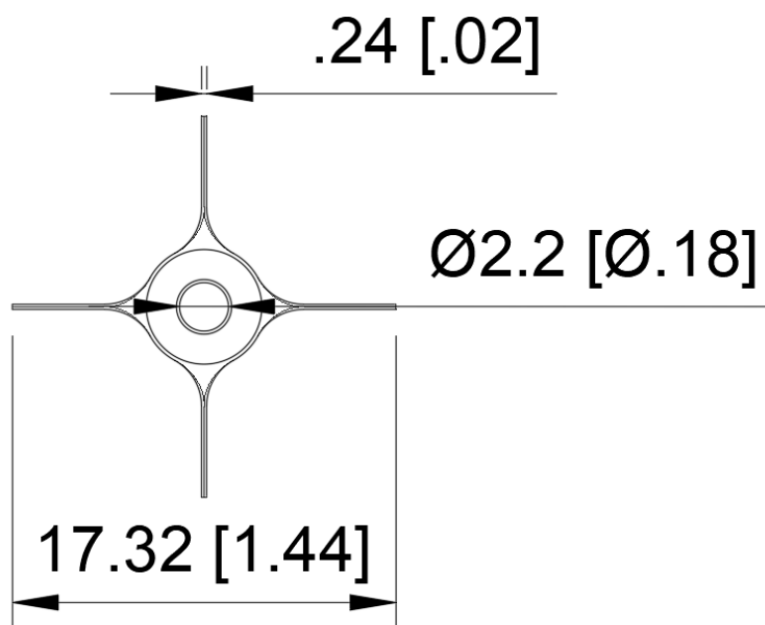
Dimension drawing of our vehicle from a bottom-up view
